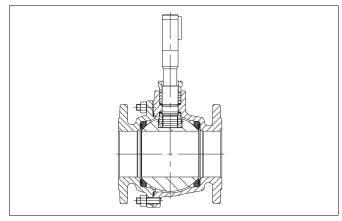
Construction, sizes DN 50/1" to DN 200/8", seat supported ball
